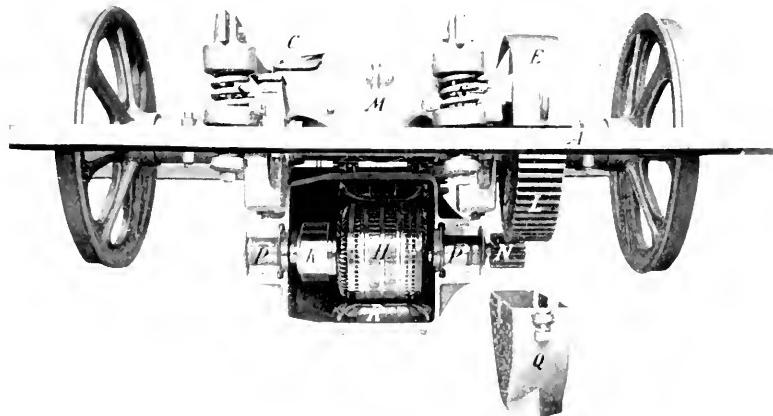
RAILWAY MOTOR WITH CASING OPEN, SHOWING ARMATURE IN LOWER HALF.
